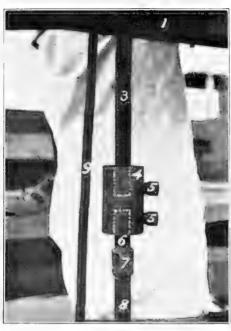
Detail of propeller shaft couplings. 1, underside of shaft beam; 3, upper steel portion of shaft, which beats gear on top and enters sleeve coupling below; 4, east sleeve coupling; 5, set screws holding shafts in coupling; 6, short piece of steel shaft; 7, pipe coupling; 8, lower part of shaft, made of pipe; 9, measuring stick, made of sections 6 inches long.
